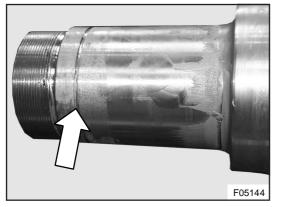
O-ring groove in axle spindle. This O-ring groove is without function when a new type "unitied" bearing is used.
